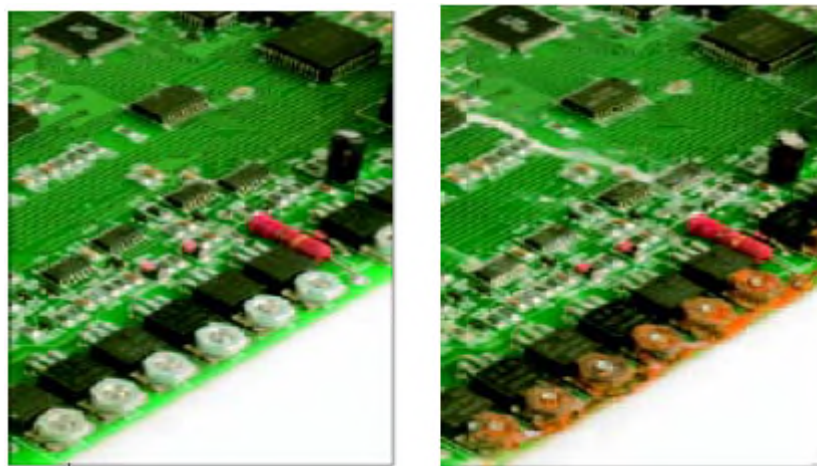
Parylene HT® coated (left side) and corroded uncoated PCB board (right side) after salt fog test. Taken from Kumar. R, et al²⁰.
